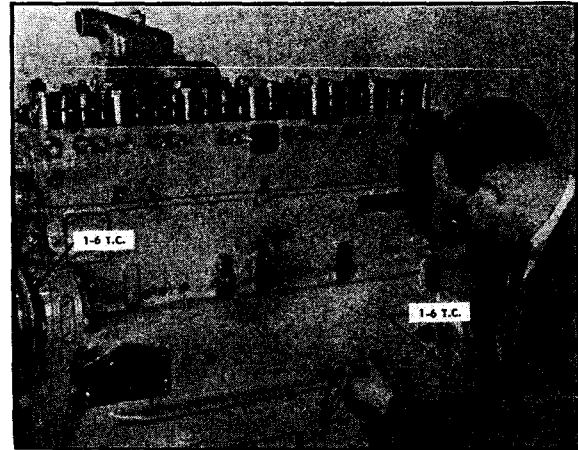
1-6 TC marks on flywheel and flywheel housing
